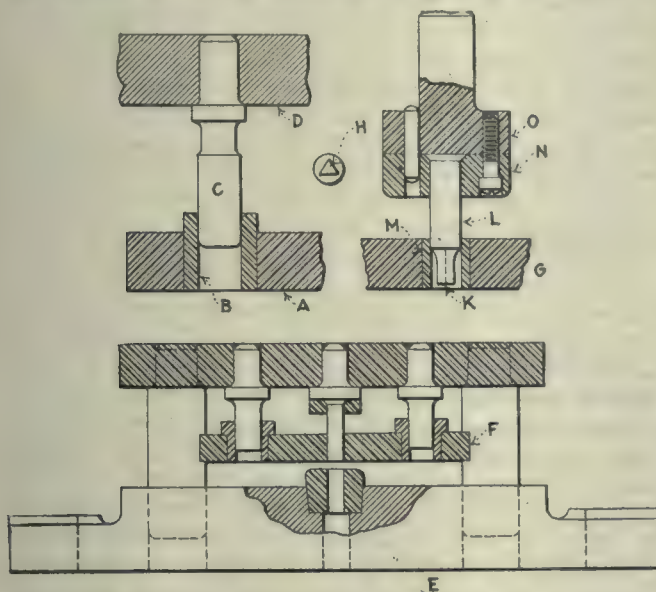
STRIPPERS, STRIPPER GUIDE PINS AND PUNCH FOR HOLE NOT ROUND
